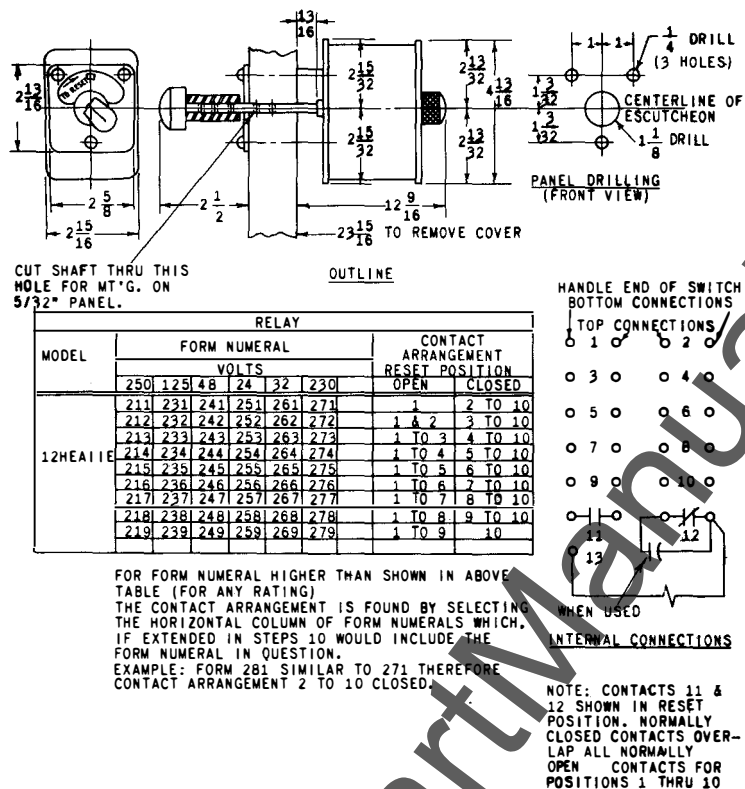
Outline, Panel Drilling And Internal Connections For Type HEA11E Relay
